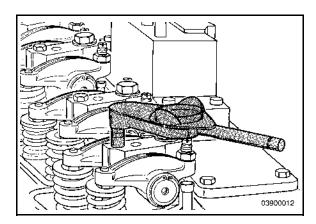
TIGHTEN THE 8 MM PEDESTAL CAPSCREWS
